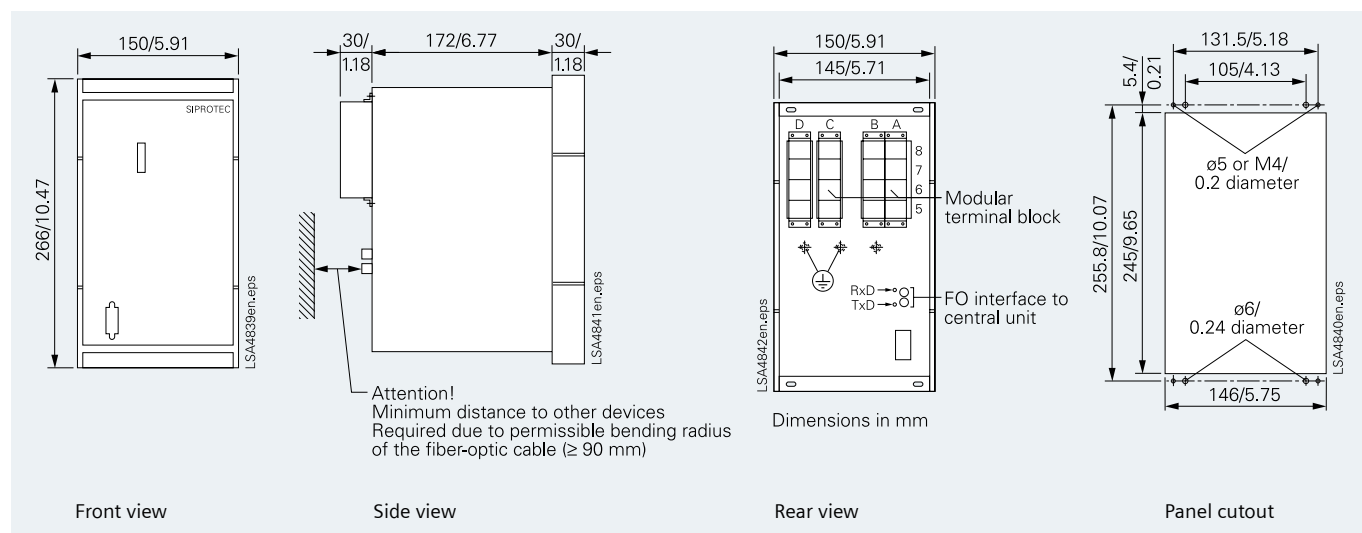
/29 7SS525 busbar and breaker failure protection unit for panel flush mounting/cubicle mounting with housing for wall mounting
